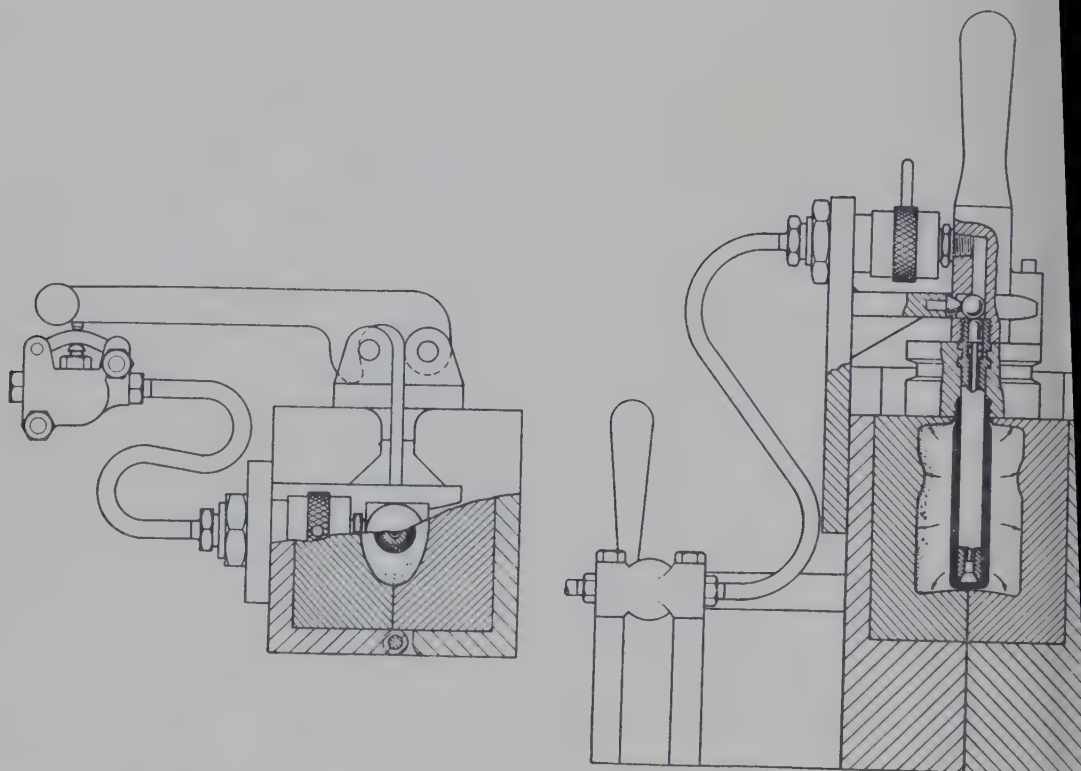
Two views of the bottle blowing fixture to which the detachable blowing head assembly containing the hot injection moulded tube, is transferred from the injection machine
